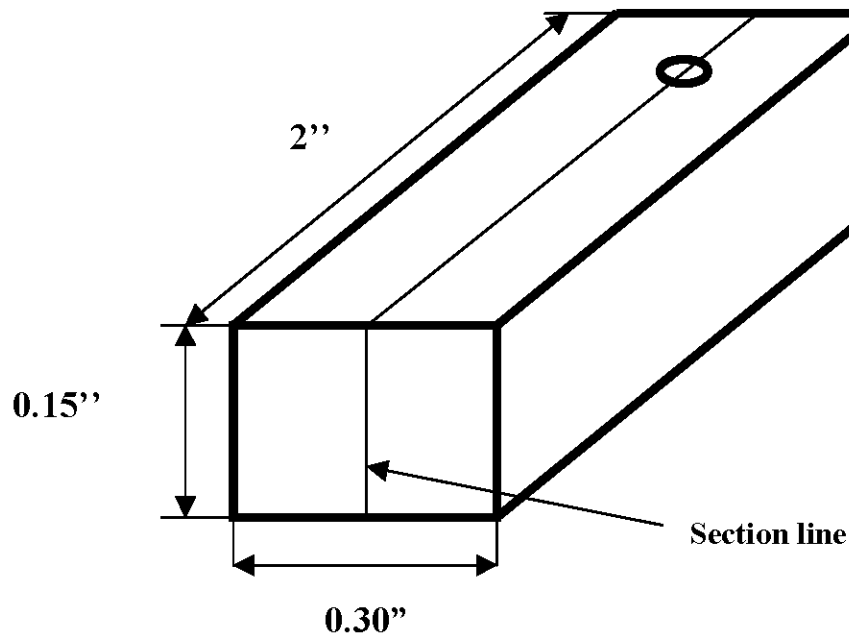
Schematic diagram of a metal coupon showing typical dimensions and line indicating where the coupon is sectioned after testing.
